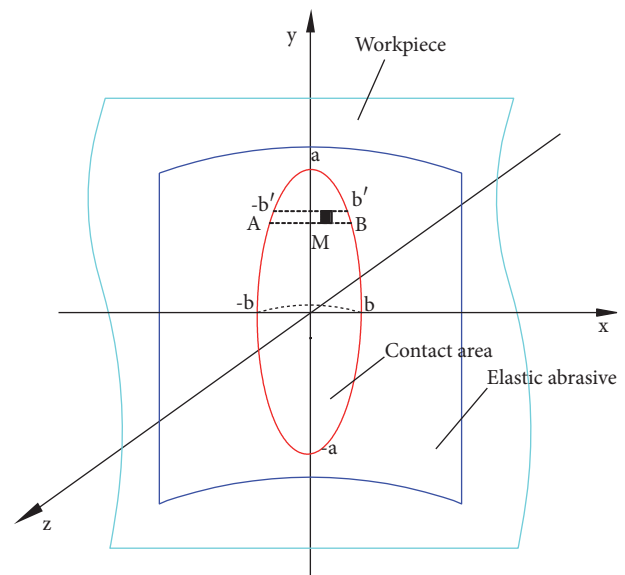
Contact status of spherical grinding head and workpiece surface.
